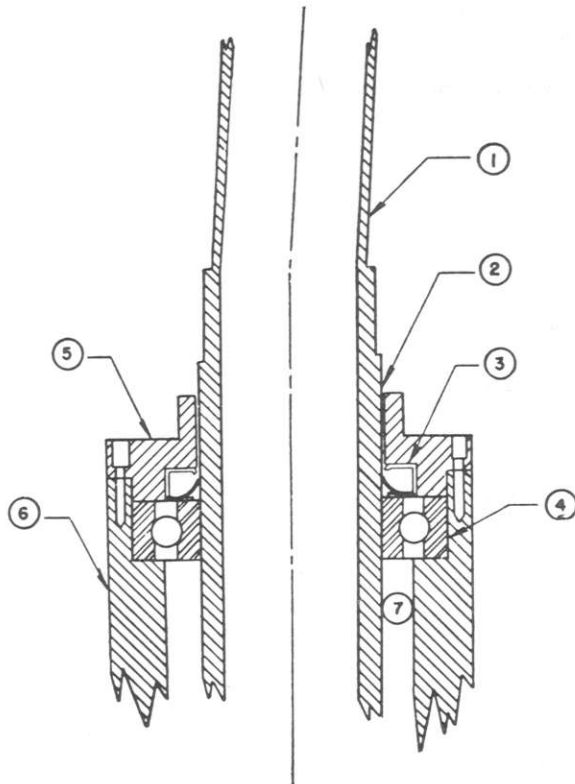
Rotating waveguide, oil seal, and bearing.
